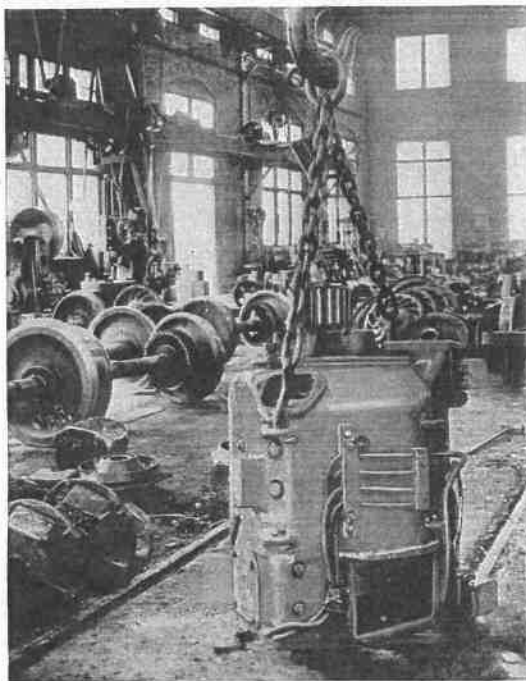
A 140-H.P. Box Frame Motor removed from truck and turned on end preparatory to lifting out armature
